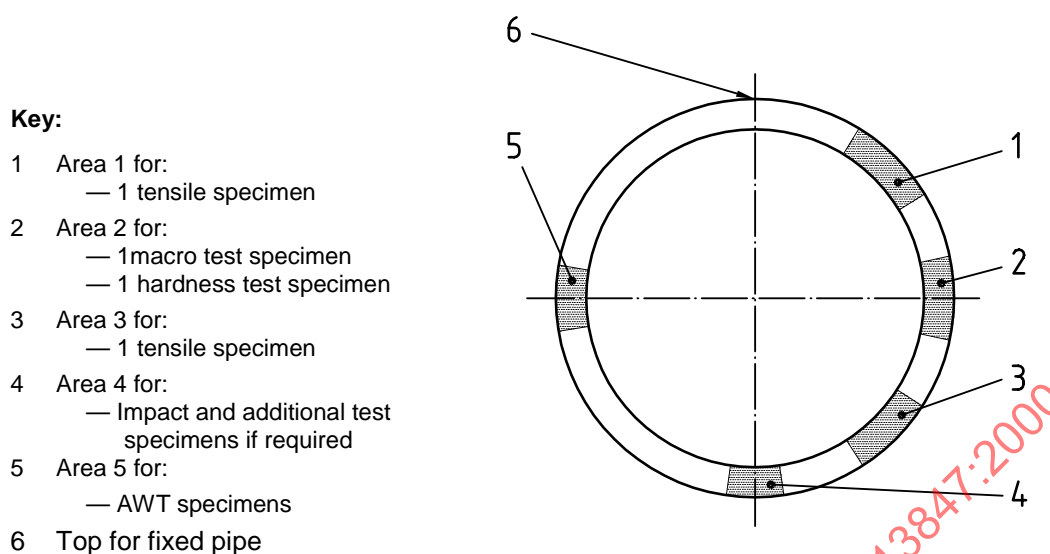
Location of test specimens for a fixed-position girth weld in pipe for downwards welding
